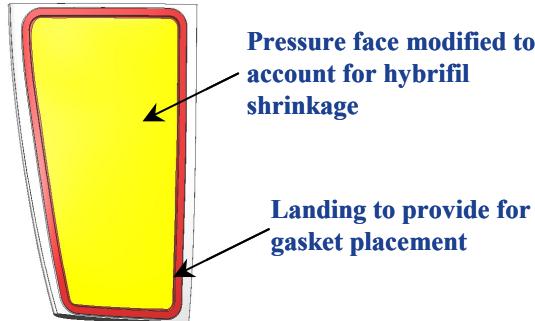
33.5" Advanced Aero Design: Caul Sheet Machining
